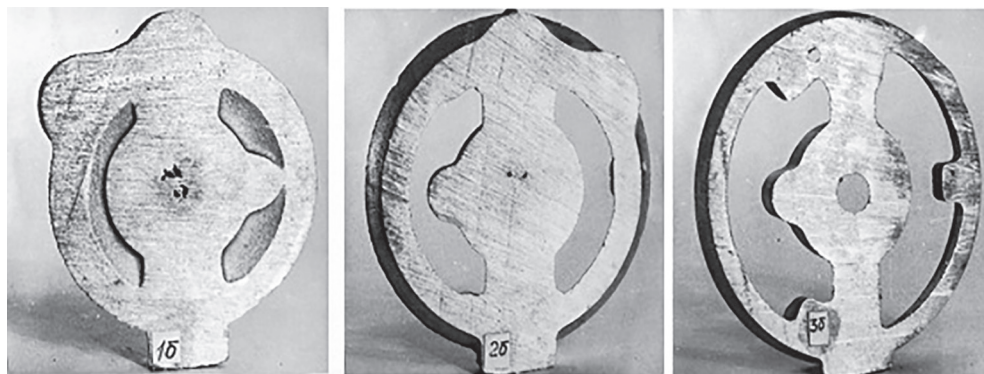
Cross-sections of the castings produced with side metal feeding technique: 1 b – 30 mm from the lower end of the casting piece; 2 b – 45 mm from the lower end of the casting piece; 3 b – 60 mm from the lower end of the casting piece
